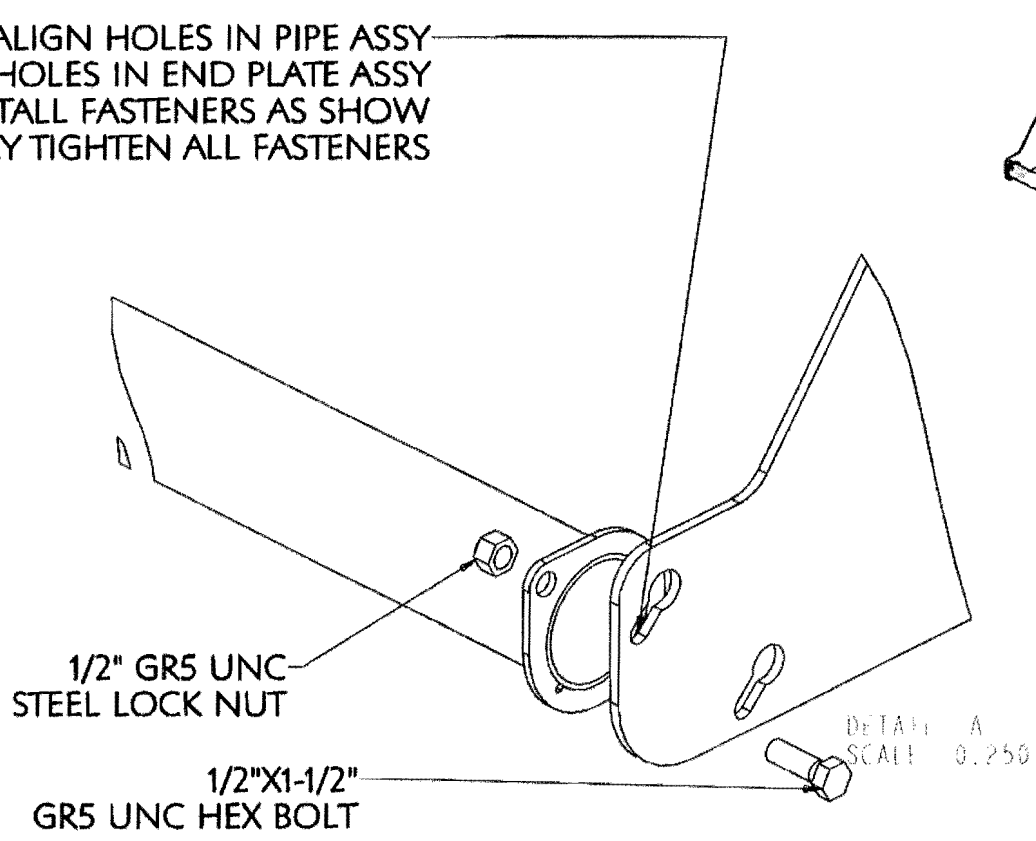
(C)—TIRE CARRIER ASSEMBLY
